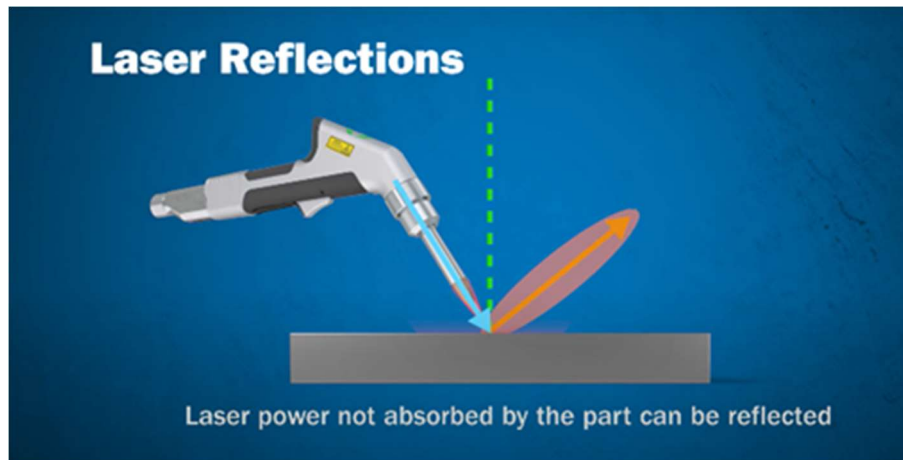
Schematic drawing showing reflection during laser welding [courtesy of Miller Electric Mfg LLC, USA].
